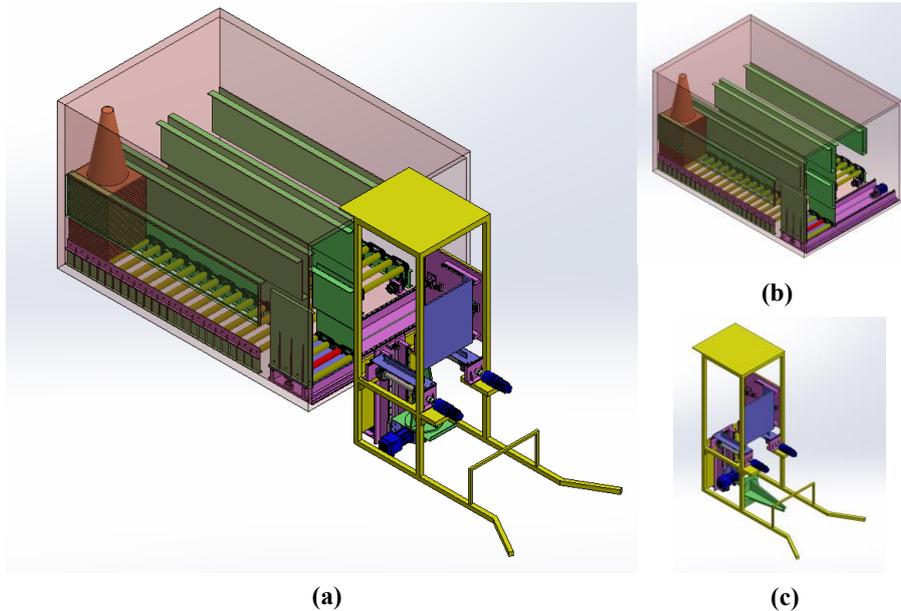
(a) Overall design of traffic cone collector machine (b) Storage mechanism (b) Collecting mechanism.
